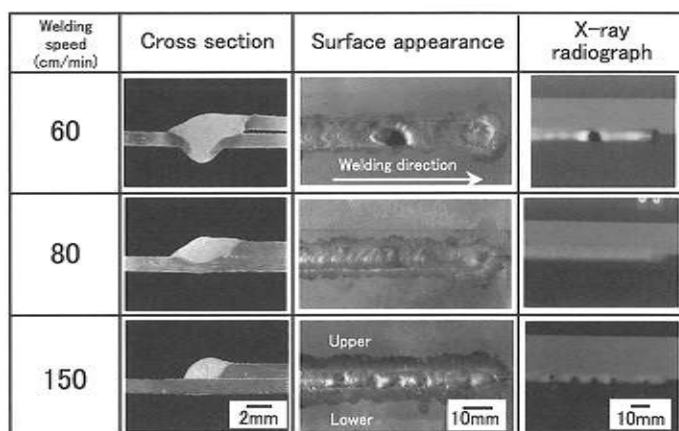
Macrostructure of cross section, surface appearance and X-ray radiograph of lap joint weld bead without joint gap at welding current 58 A.
